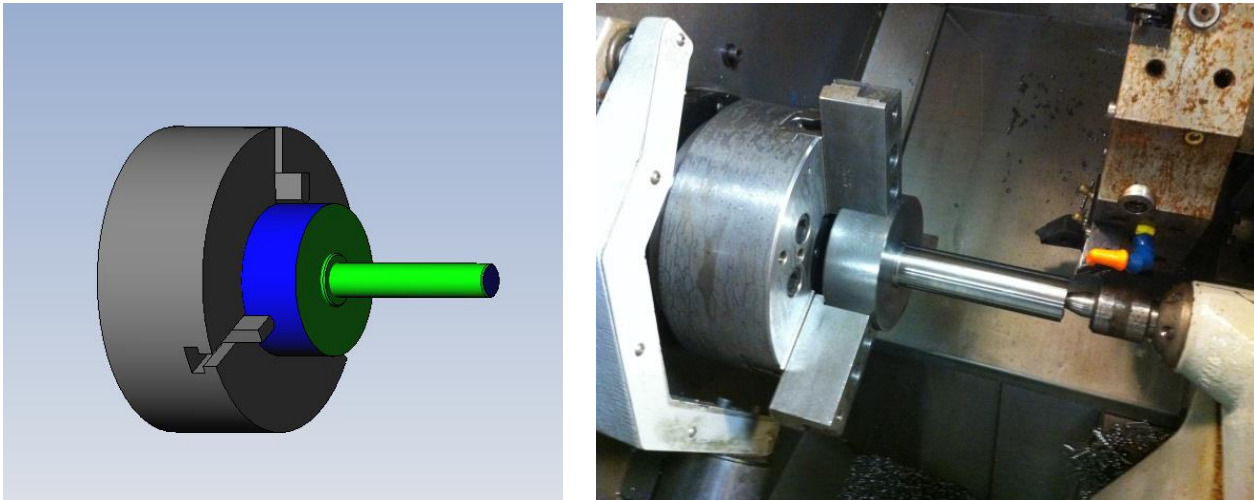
(Left) Esprit CAM Simulation for OD Turning of Crankshaft; (Right) Crankshaft OD Turning
